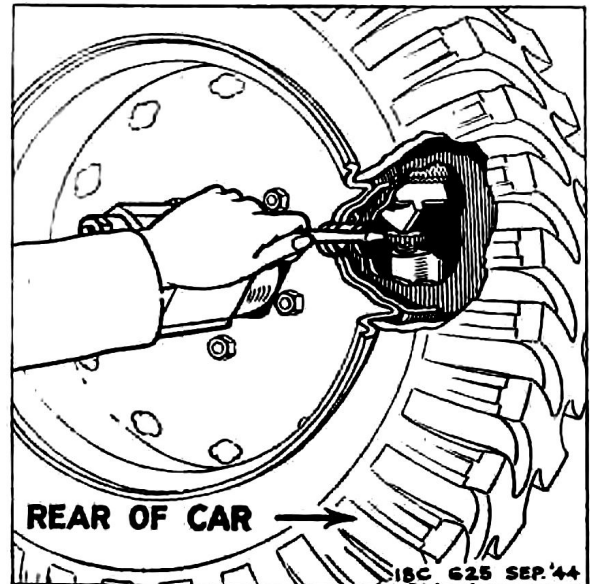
BRAKE ADJUSTMENT (REAR).
